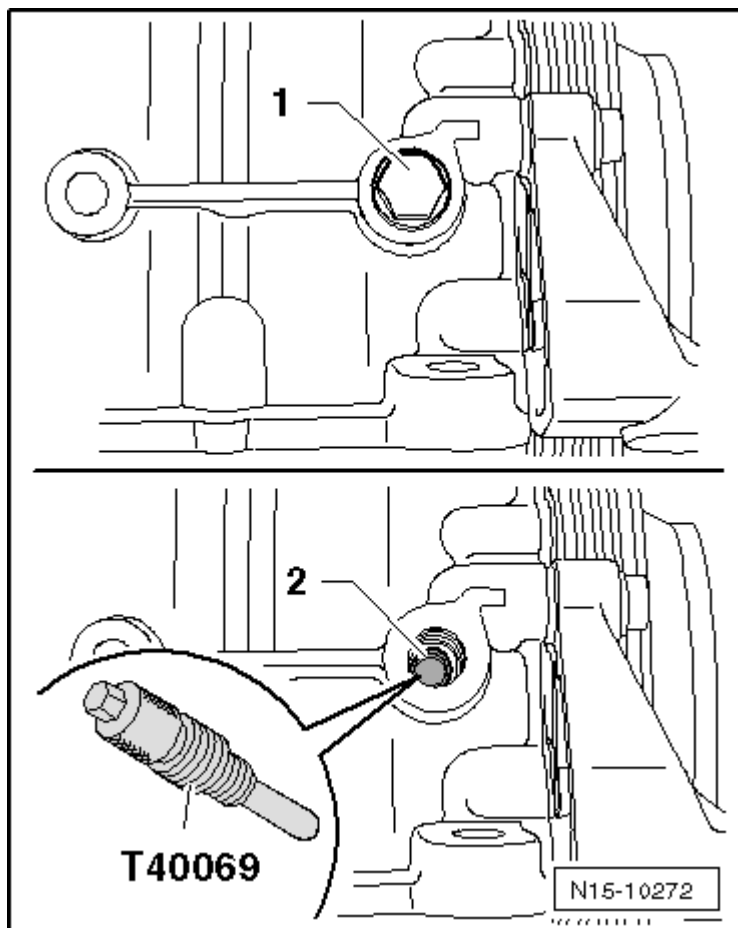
Identifying Locking Pin T40069 And Installing Plug
